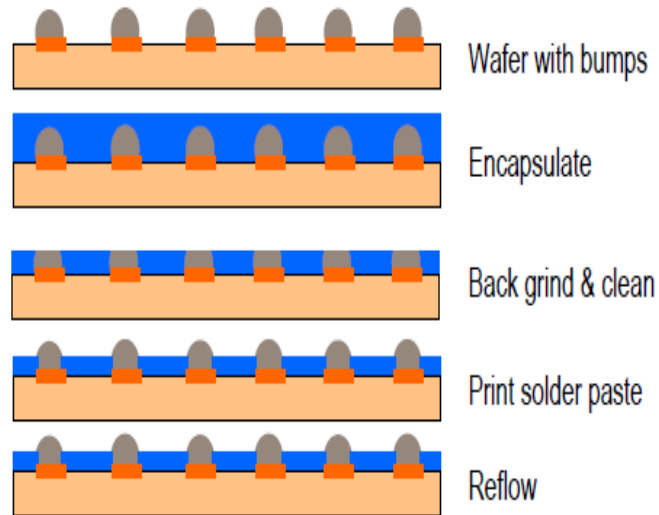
Process flow of a back grind and double bump coating-type wafer level solder brace
